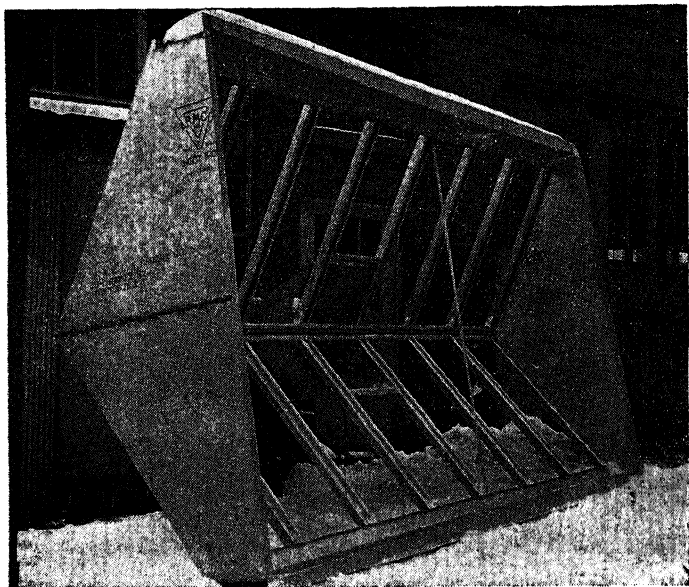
Skylight fabricated from galvanized iron by the carbon arc process with copper alloy filler rod. Size: 12 ft. by 9 ft.
